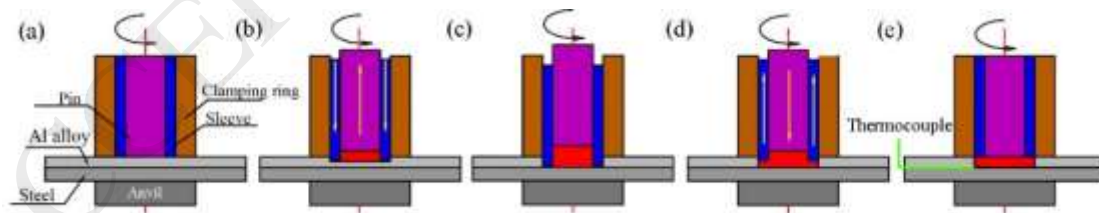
Schematic representation of refill FSSW process: (a) surface preheating while clamping and spindles rotation, (b) sleeve plunges into the sheets while pin moves upwards, (c) tool dwells at a predetermined penetration depth, (d) spindles retract back, and (e) surface dwell to flatten the weld surface.
